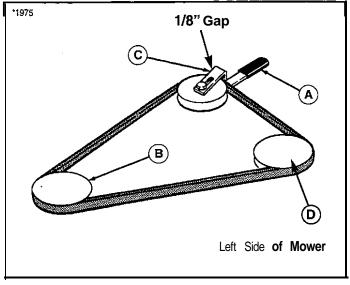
Mower Belt Routing = 44" & 50" Mower Deck C. Idler Pulley Belt Guide A. Idler Pulley Arm D. Arbor Drive Pulley B. PTO Pulley
